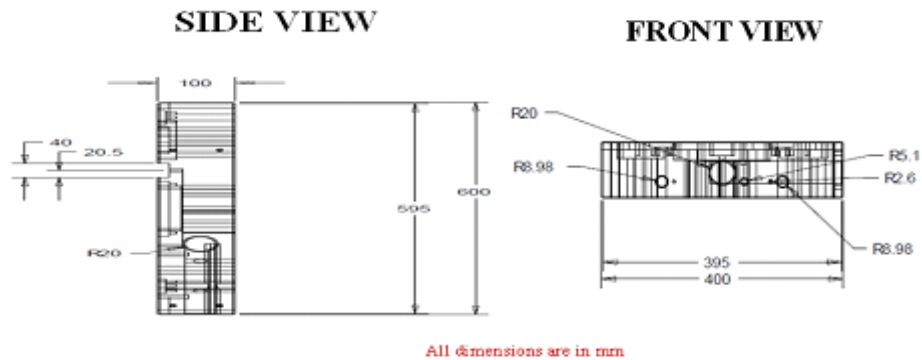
2 Dimensional Drawing of Model Prismatic Part
